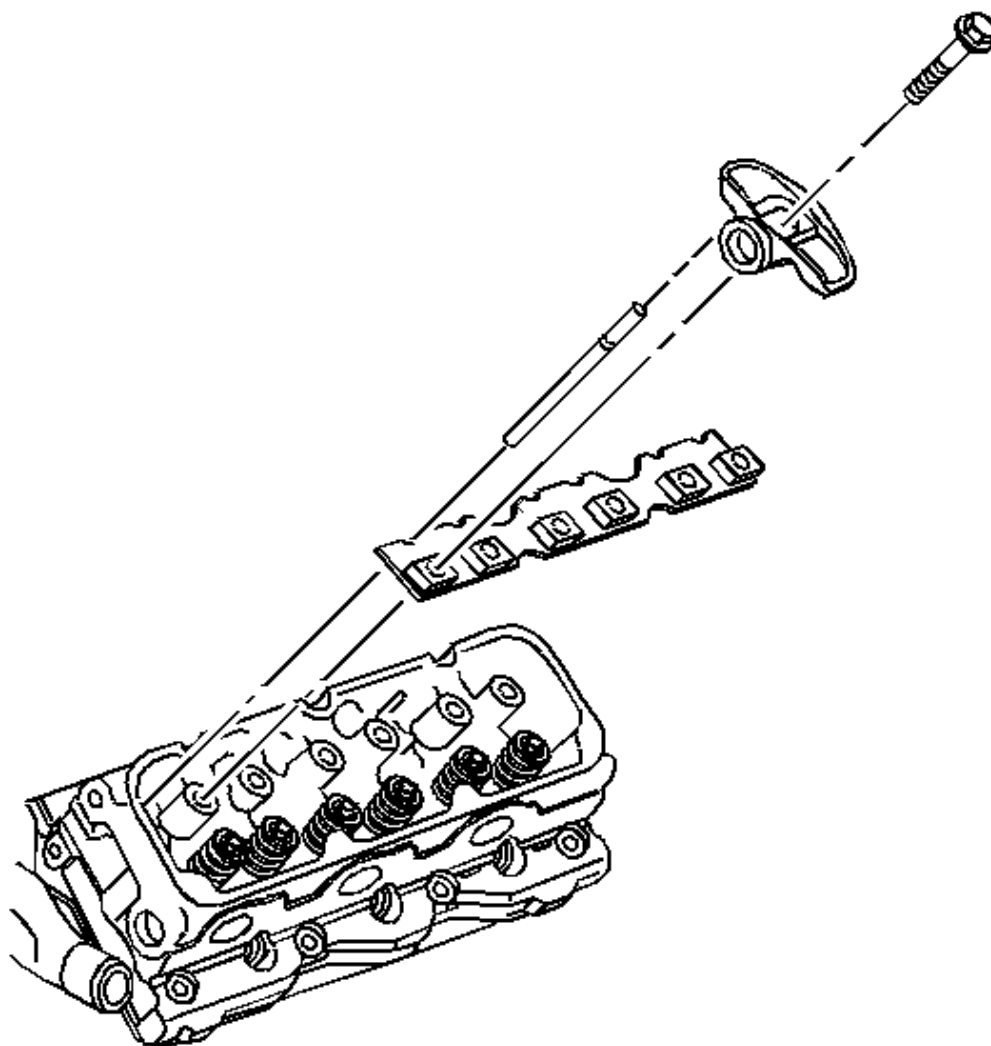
View Of Valve Rocker Arm, Bolt, Push Rod & Push Rod Guide Plate
